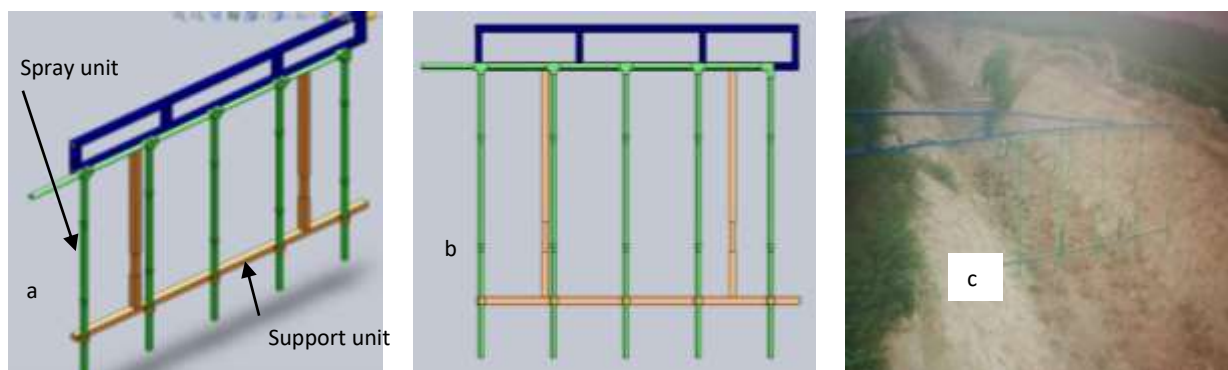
Three-dimensional prototype presentation isometric (a) and elevation view (b) and photographic view of the new design inside the canal (c)
